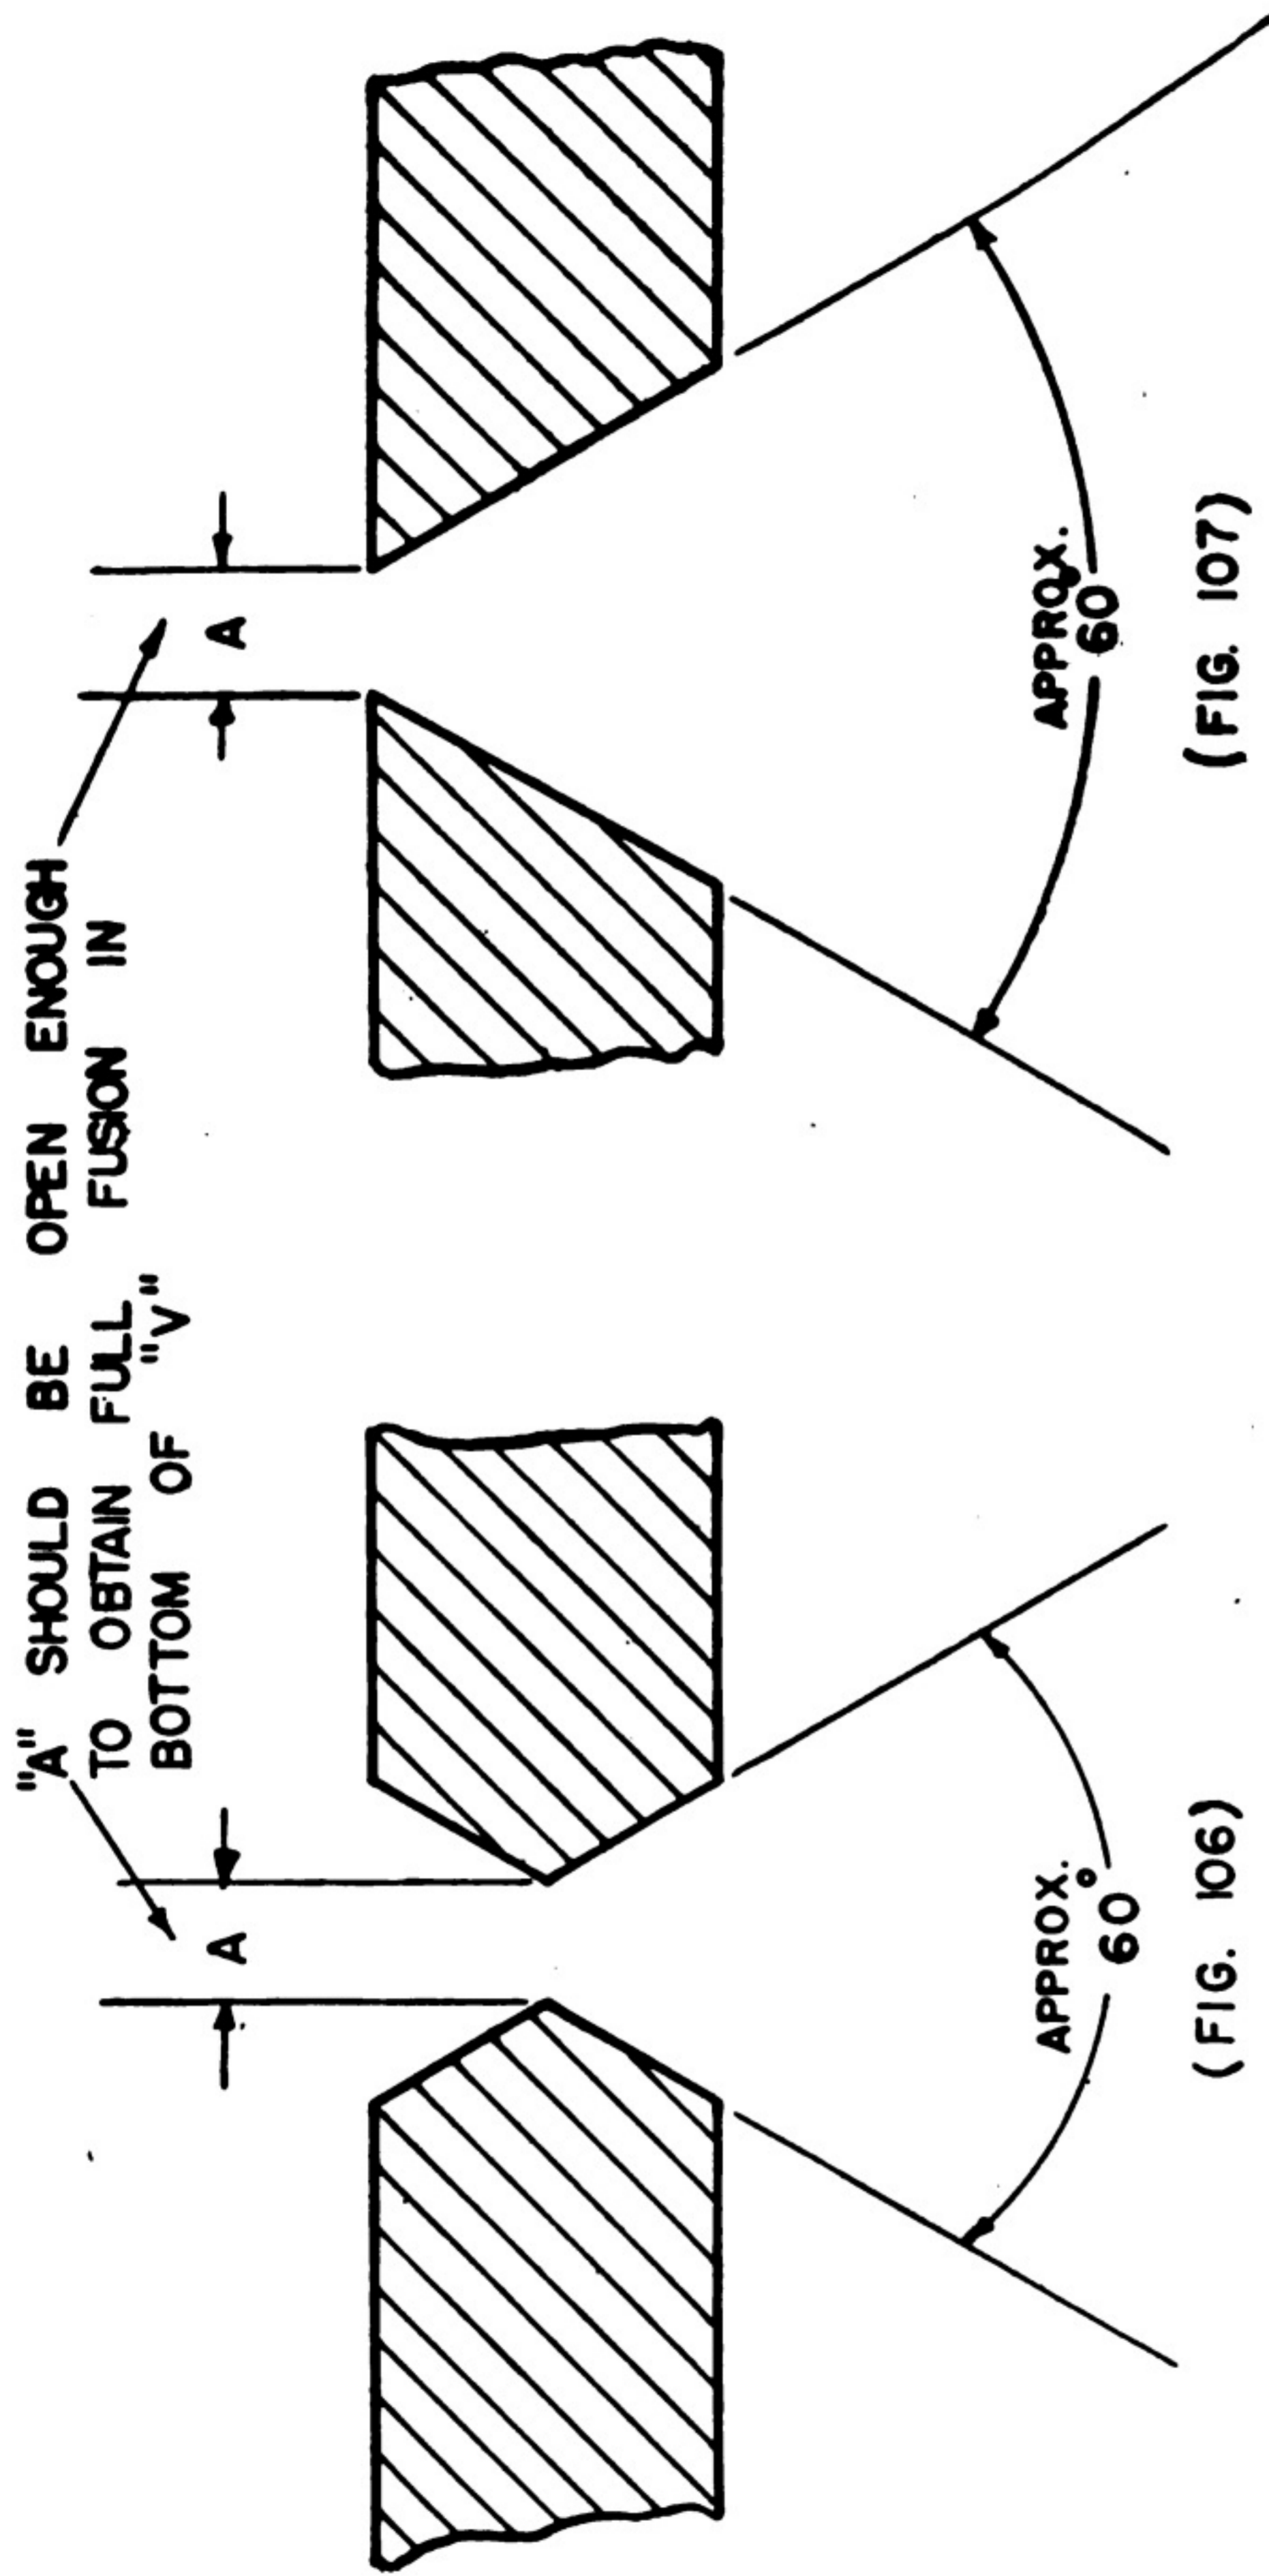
Welding procedure when both sides of fracture are accessible.
